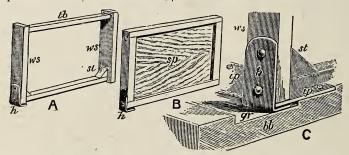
HOW THE QUINBY FRAME HOOKS ON TO THE BOTTOM.
